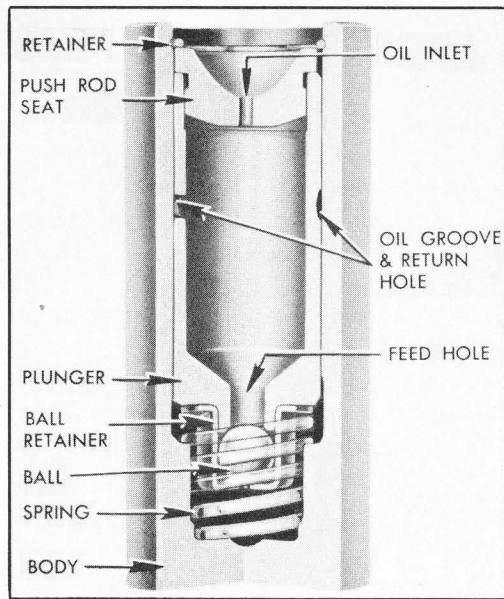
Hydraulic Valve Lifter, with Quarter Section Cut Out
